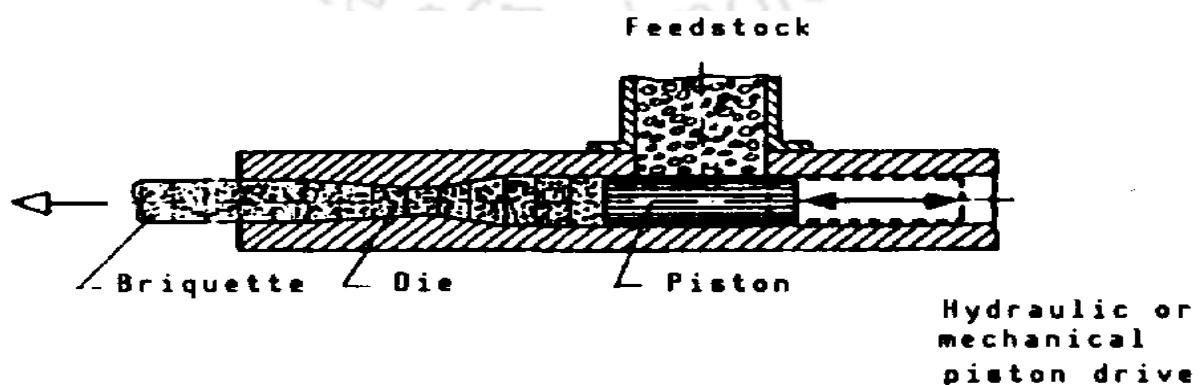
Piston press machine (Eriksson et al. [21]).
